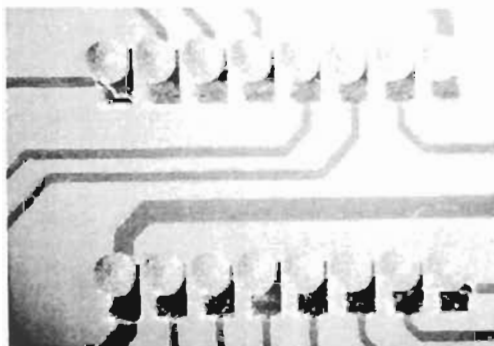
Paste displacement on surface mounted pads (EPS)
